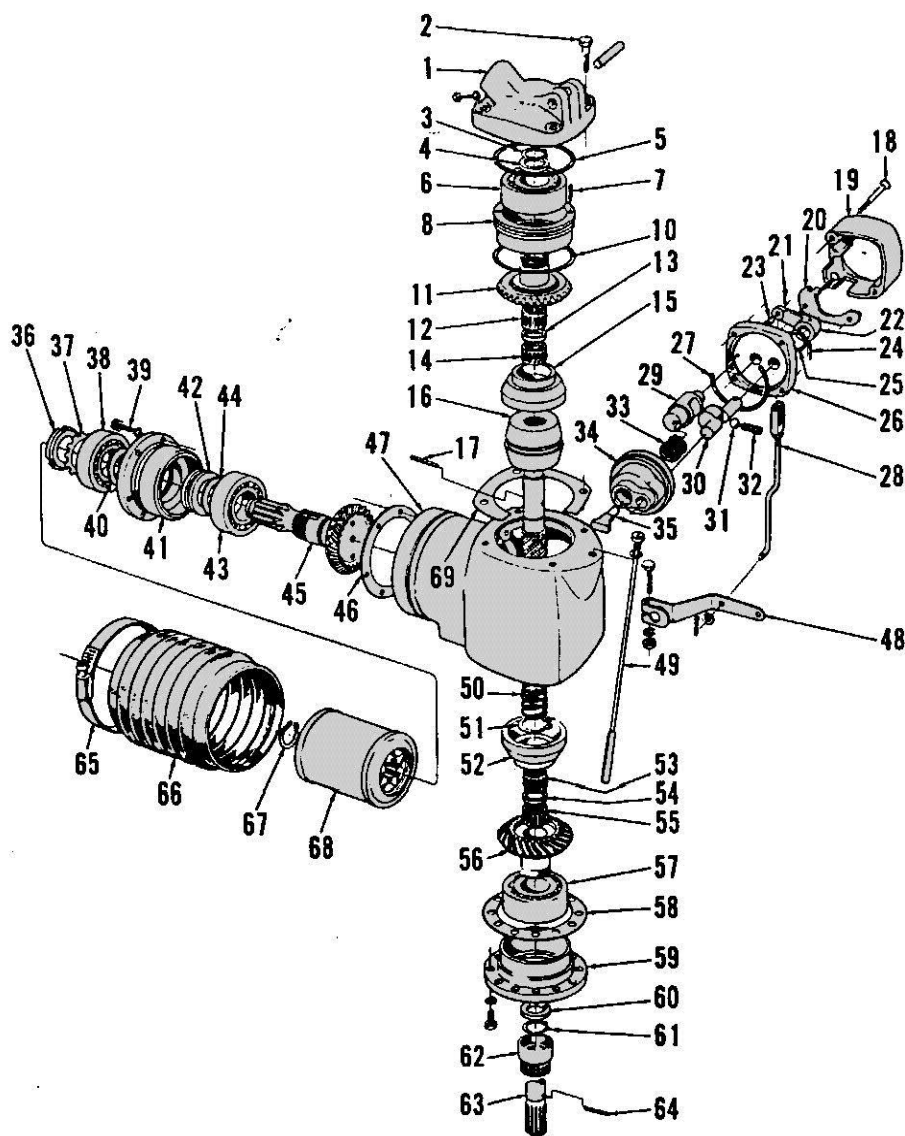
Exploded view of upper gear housing with tapered friction type clutch.
